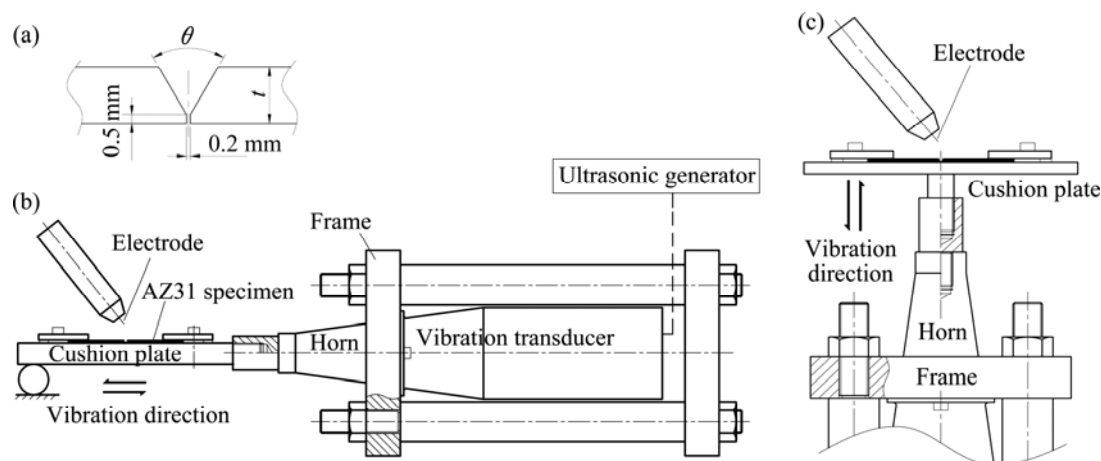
Schematic diagrams of set-up for welding with high-intensity ultrasonic emission: (a) Shape and dimension of welding groove; (b) For H-vib; (c) For V-vib
